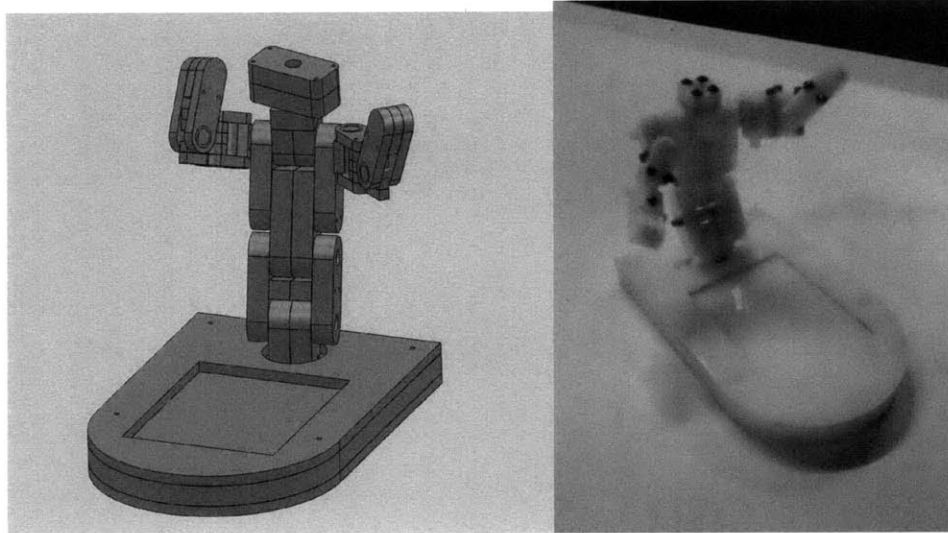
The plated prototype in SolidWorks and the built version sans head.
